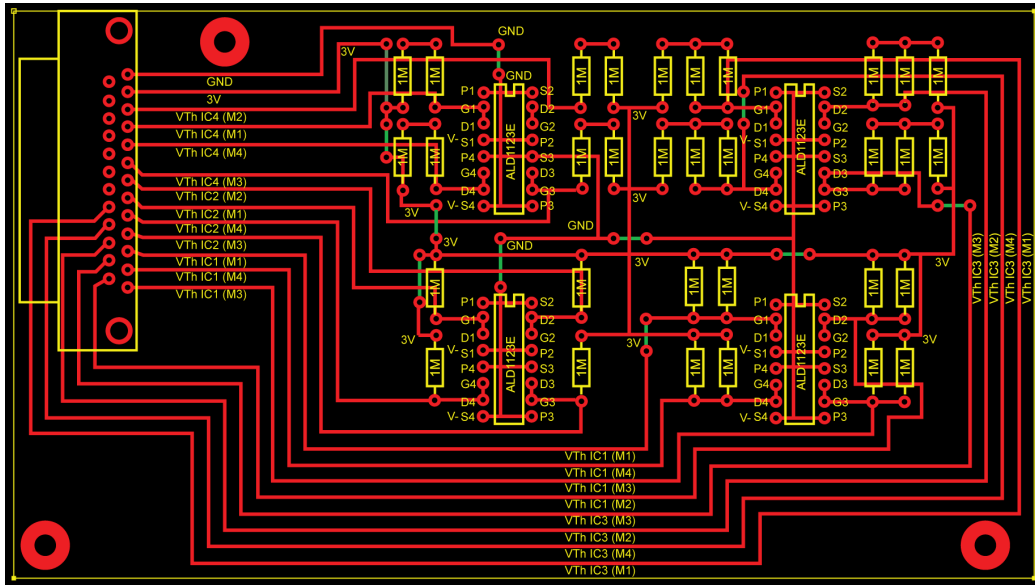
The CAD diagram of the PCB circuit containing four ALD1123E devices.
